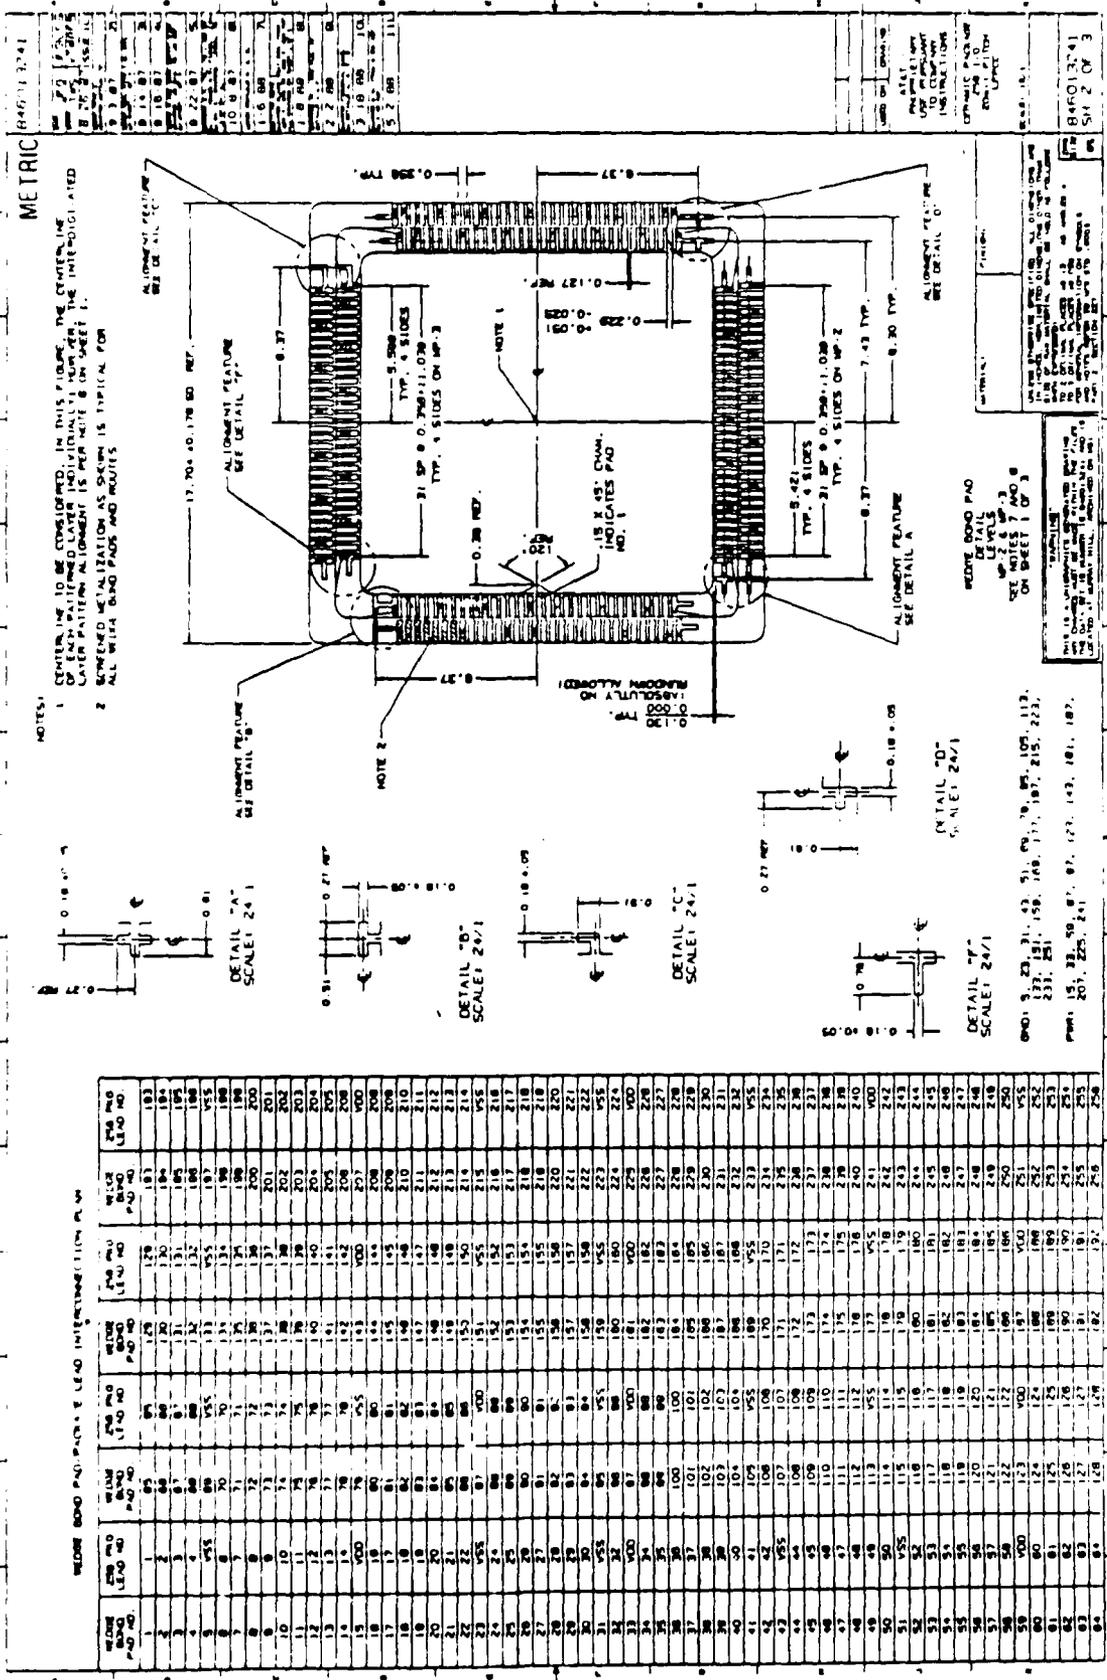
NTK 256 Leaded Package: AT&T Design, Mechanical Dimensions
